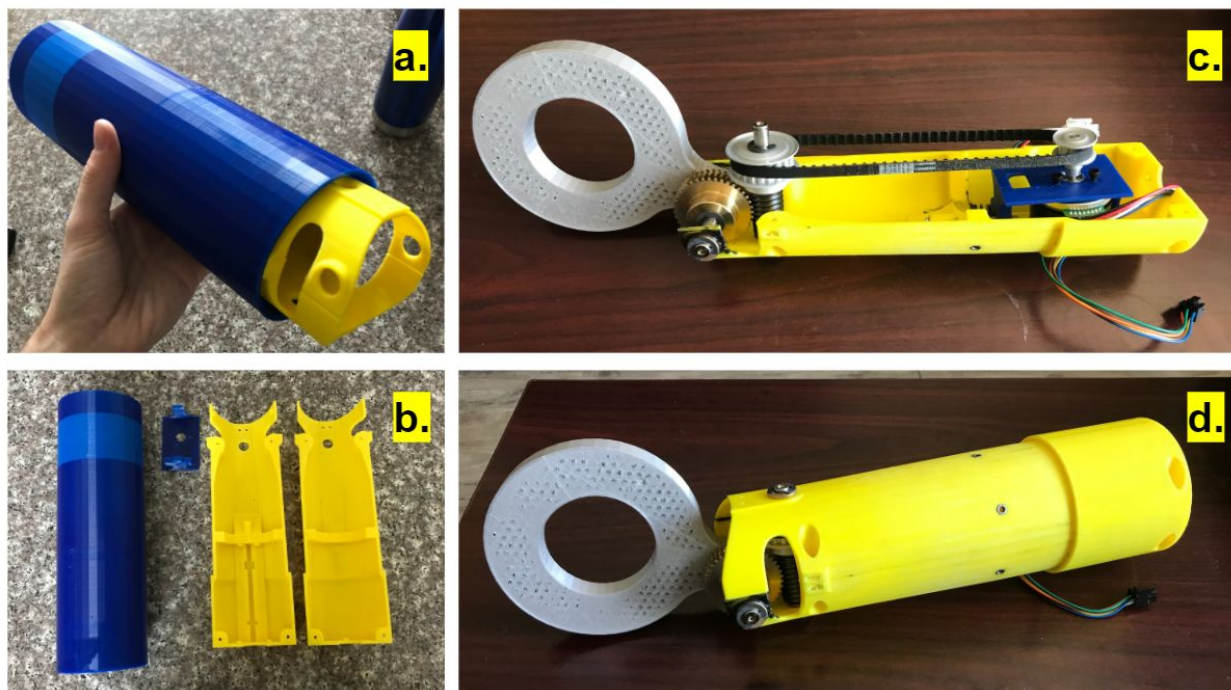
(a.) Inner and outer sleeve casings of the prototype nested in one another. (b.) 3D printed parts for the prototype laid out. These include from left to right the outer sleeve casing, the linear rail motor mount, and the two inner sleeve casings. (c.) The assembled prototype with a hand placeholder before being closed with a second inner casing. (d.) The assembled prototype without the outer casing.
